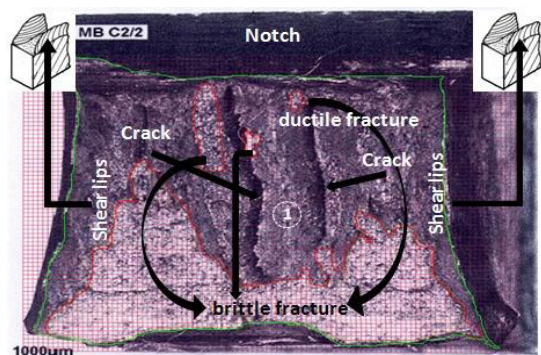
Macroscopic view of the fracture surface of BM
